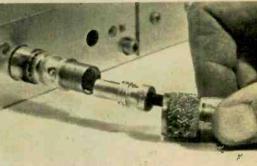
Continuous crackling sound is generally caused by coax adaptors that were not soldered to main plug. Plug shown is defective because adaptor can be unscrewed.
